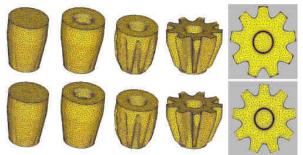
Metal flowing in hot forging (up) and cold forging (down) of the SB-gear
